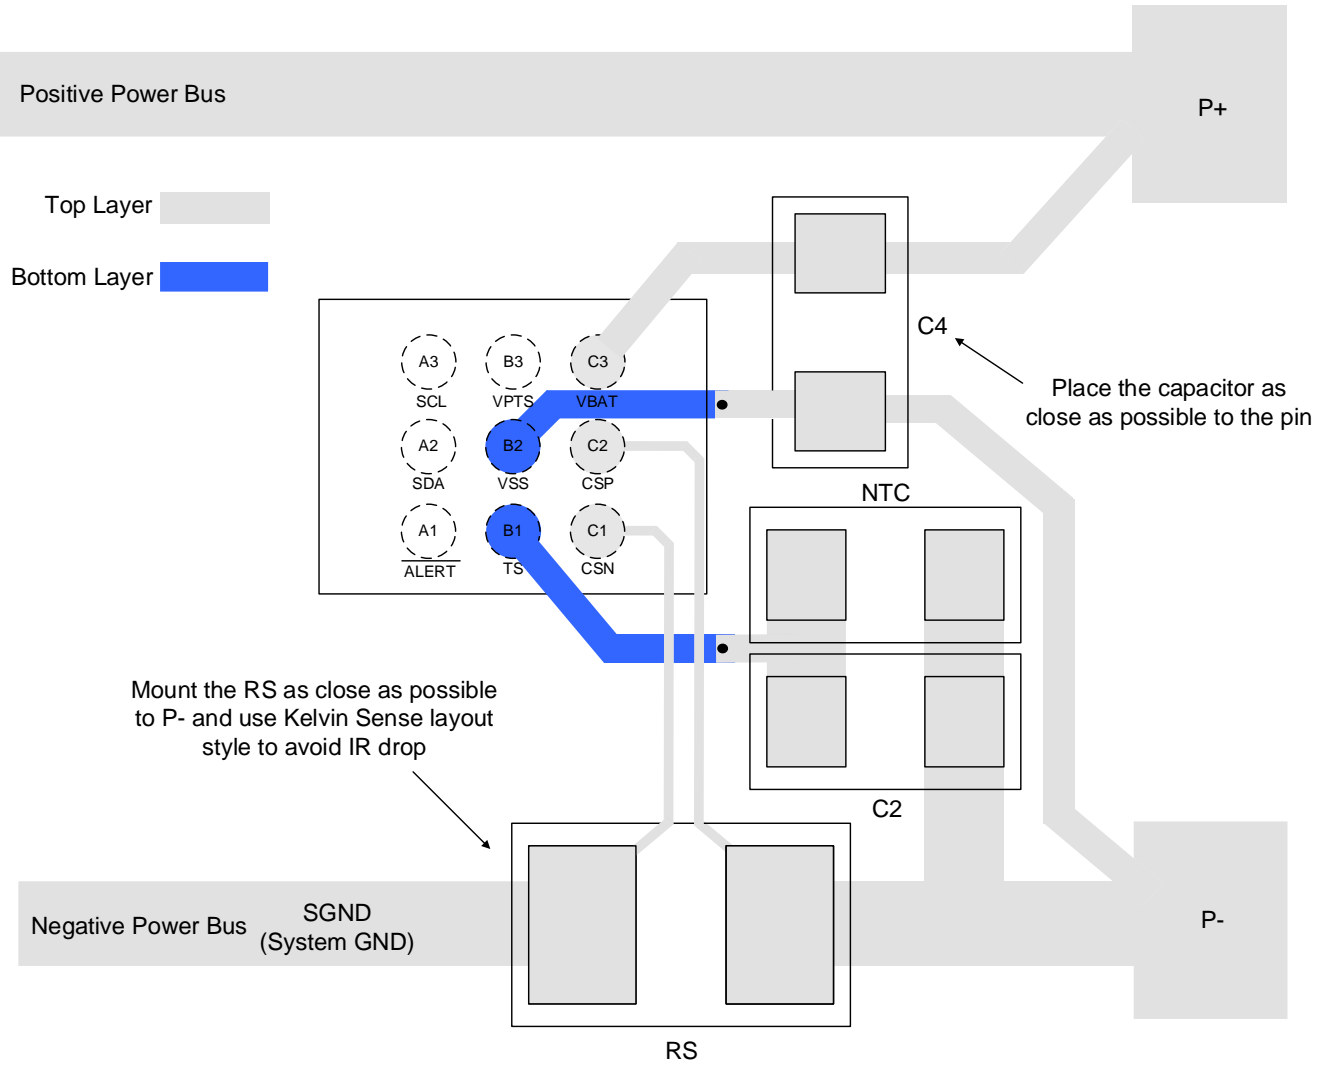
Low-Side Sensing PCB Layout Guide for WL-CSP-9B 2.29x1.74 (BSC) Package
